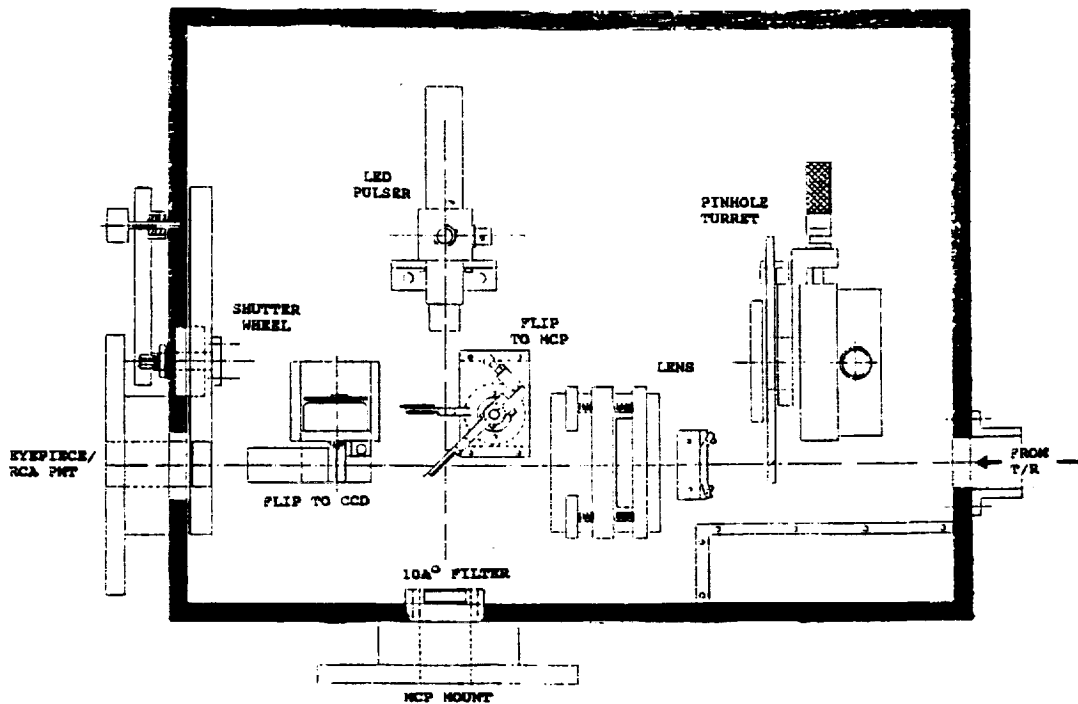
EOS Receiver assembly. (From EOS drawings.)
